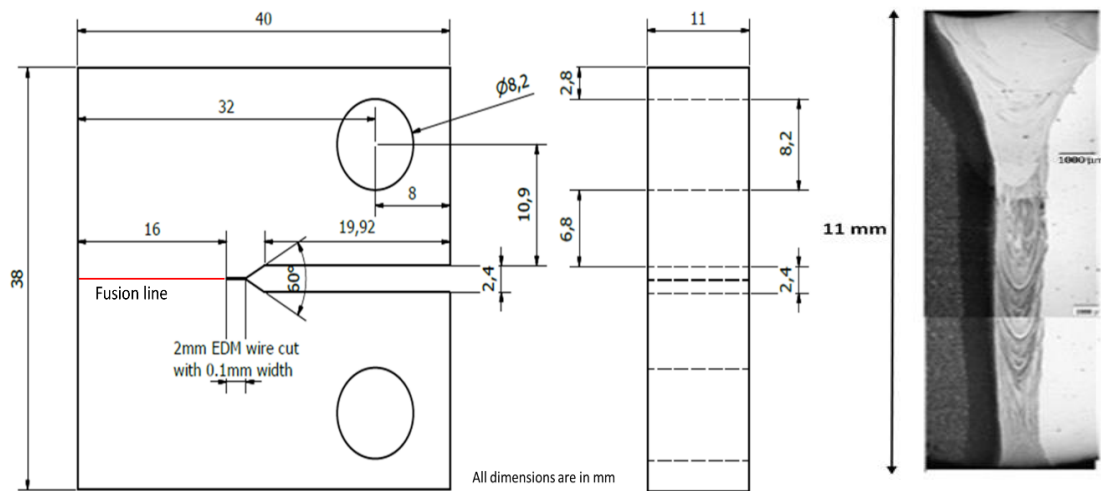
Schematic of (left) C(T) specimen (Right) cross-sectional weld macrograph
